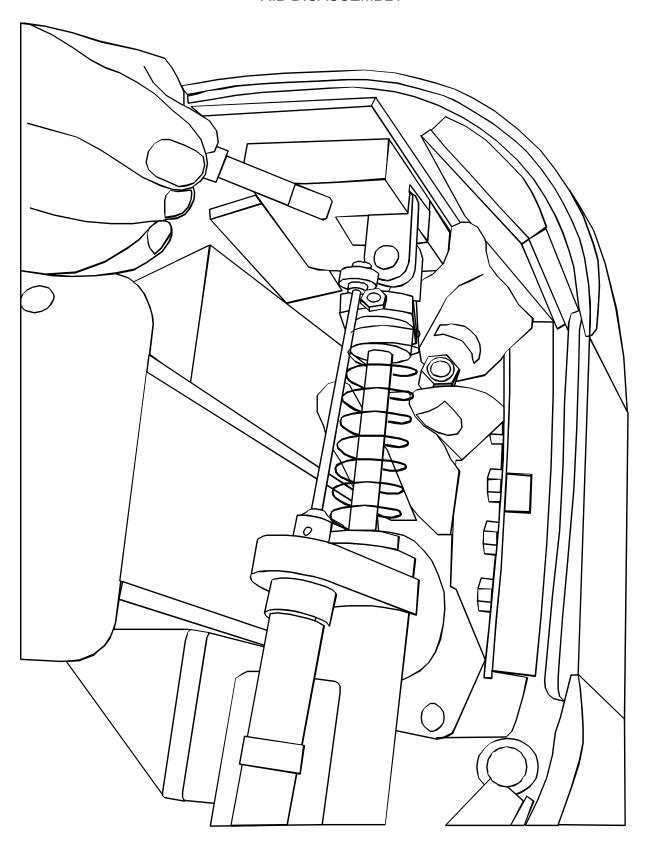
HINGE MOUNTING BLOCK REMOVAL FROM THORACIC SPINE BOX
